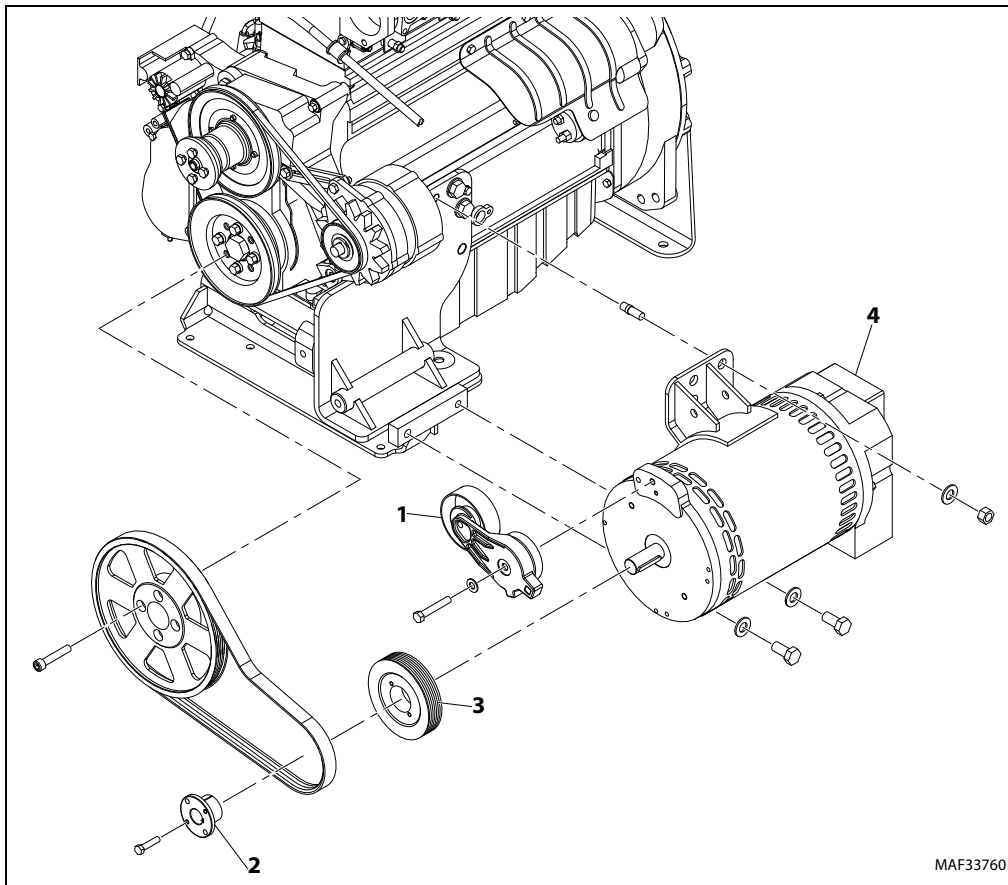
Generator and Pulley (7500W Skypower) - Deutz T4I
